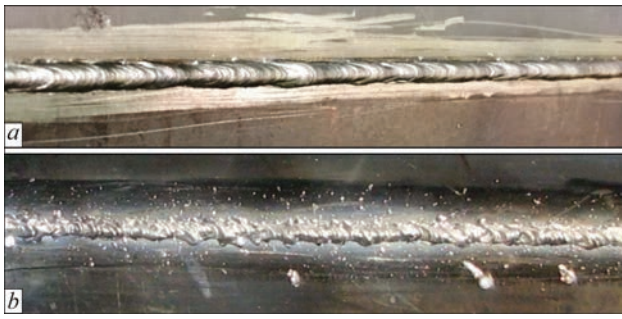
Appearance of the weld of a joint of 2219 alloy plates 40 mm thick from the side of electron beam entrance (a) and exit (b)
